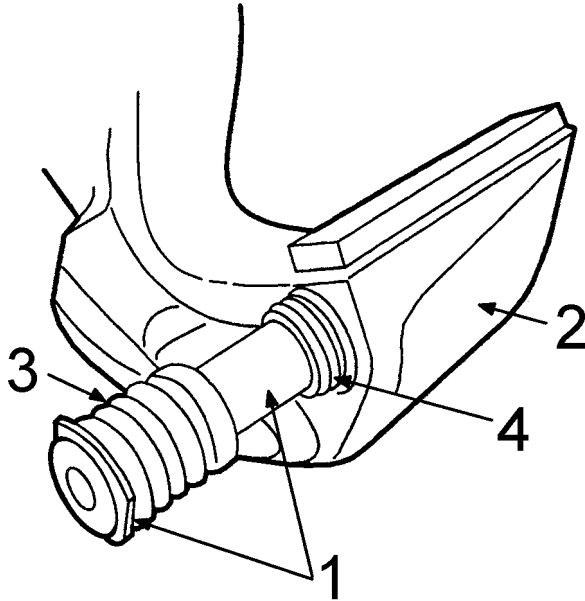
Remove Guide Pins and Guide Pin Boots from Anchor Plate
